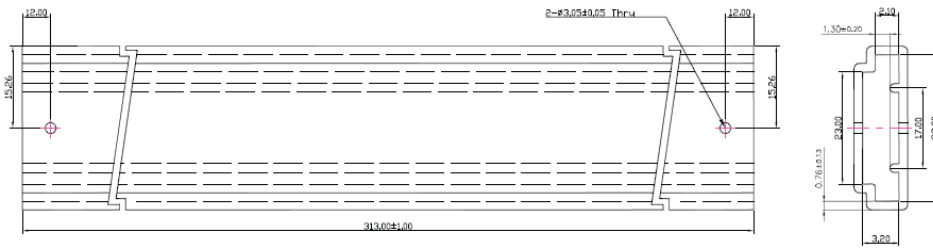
Tube dimensions for L2C5-xxxx1211F19P0.
